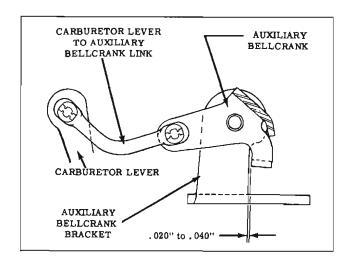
Checking Carburetor Link (2 Bbl.)
